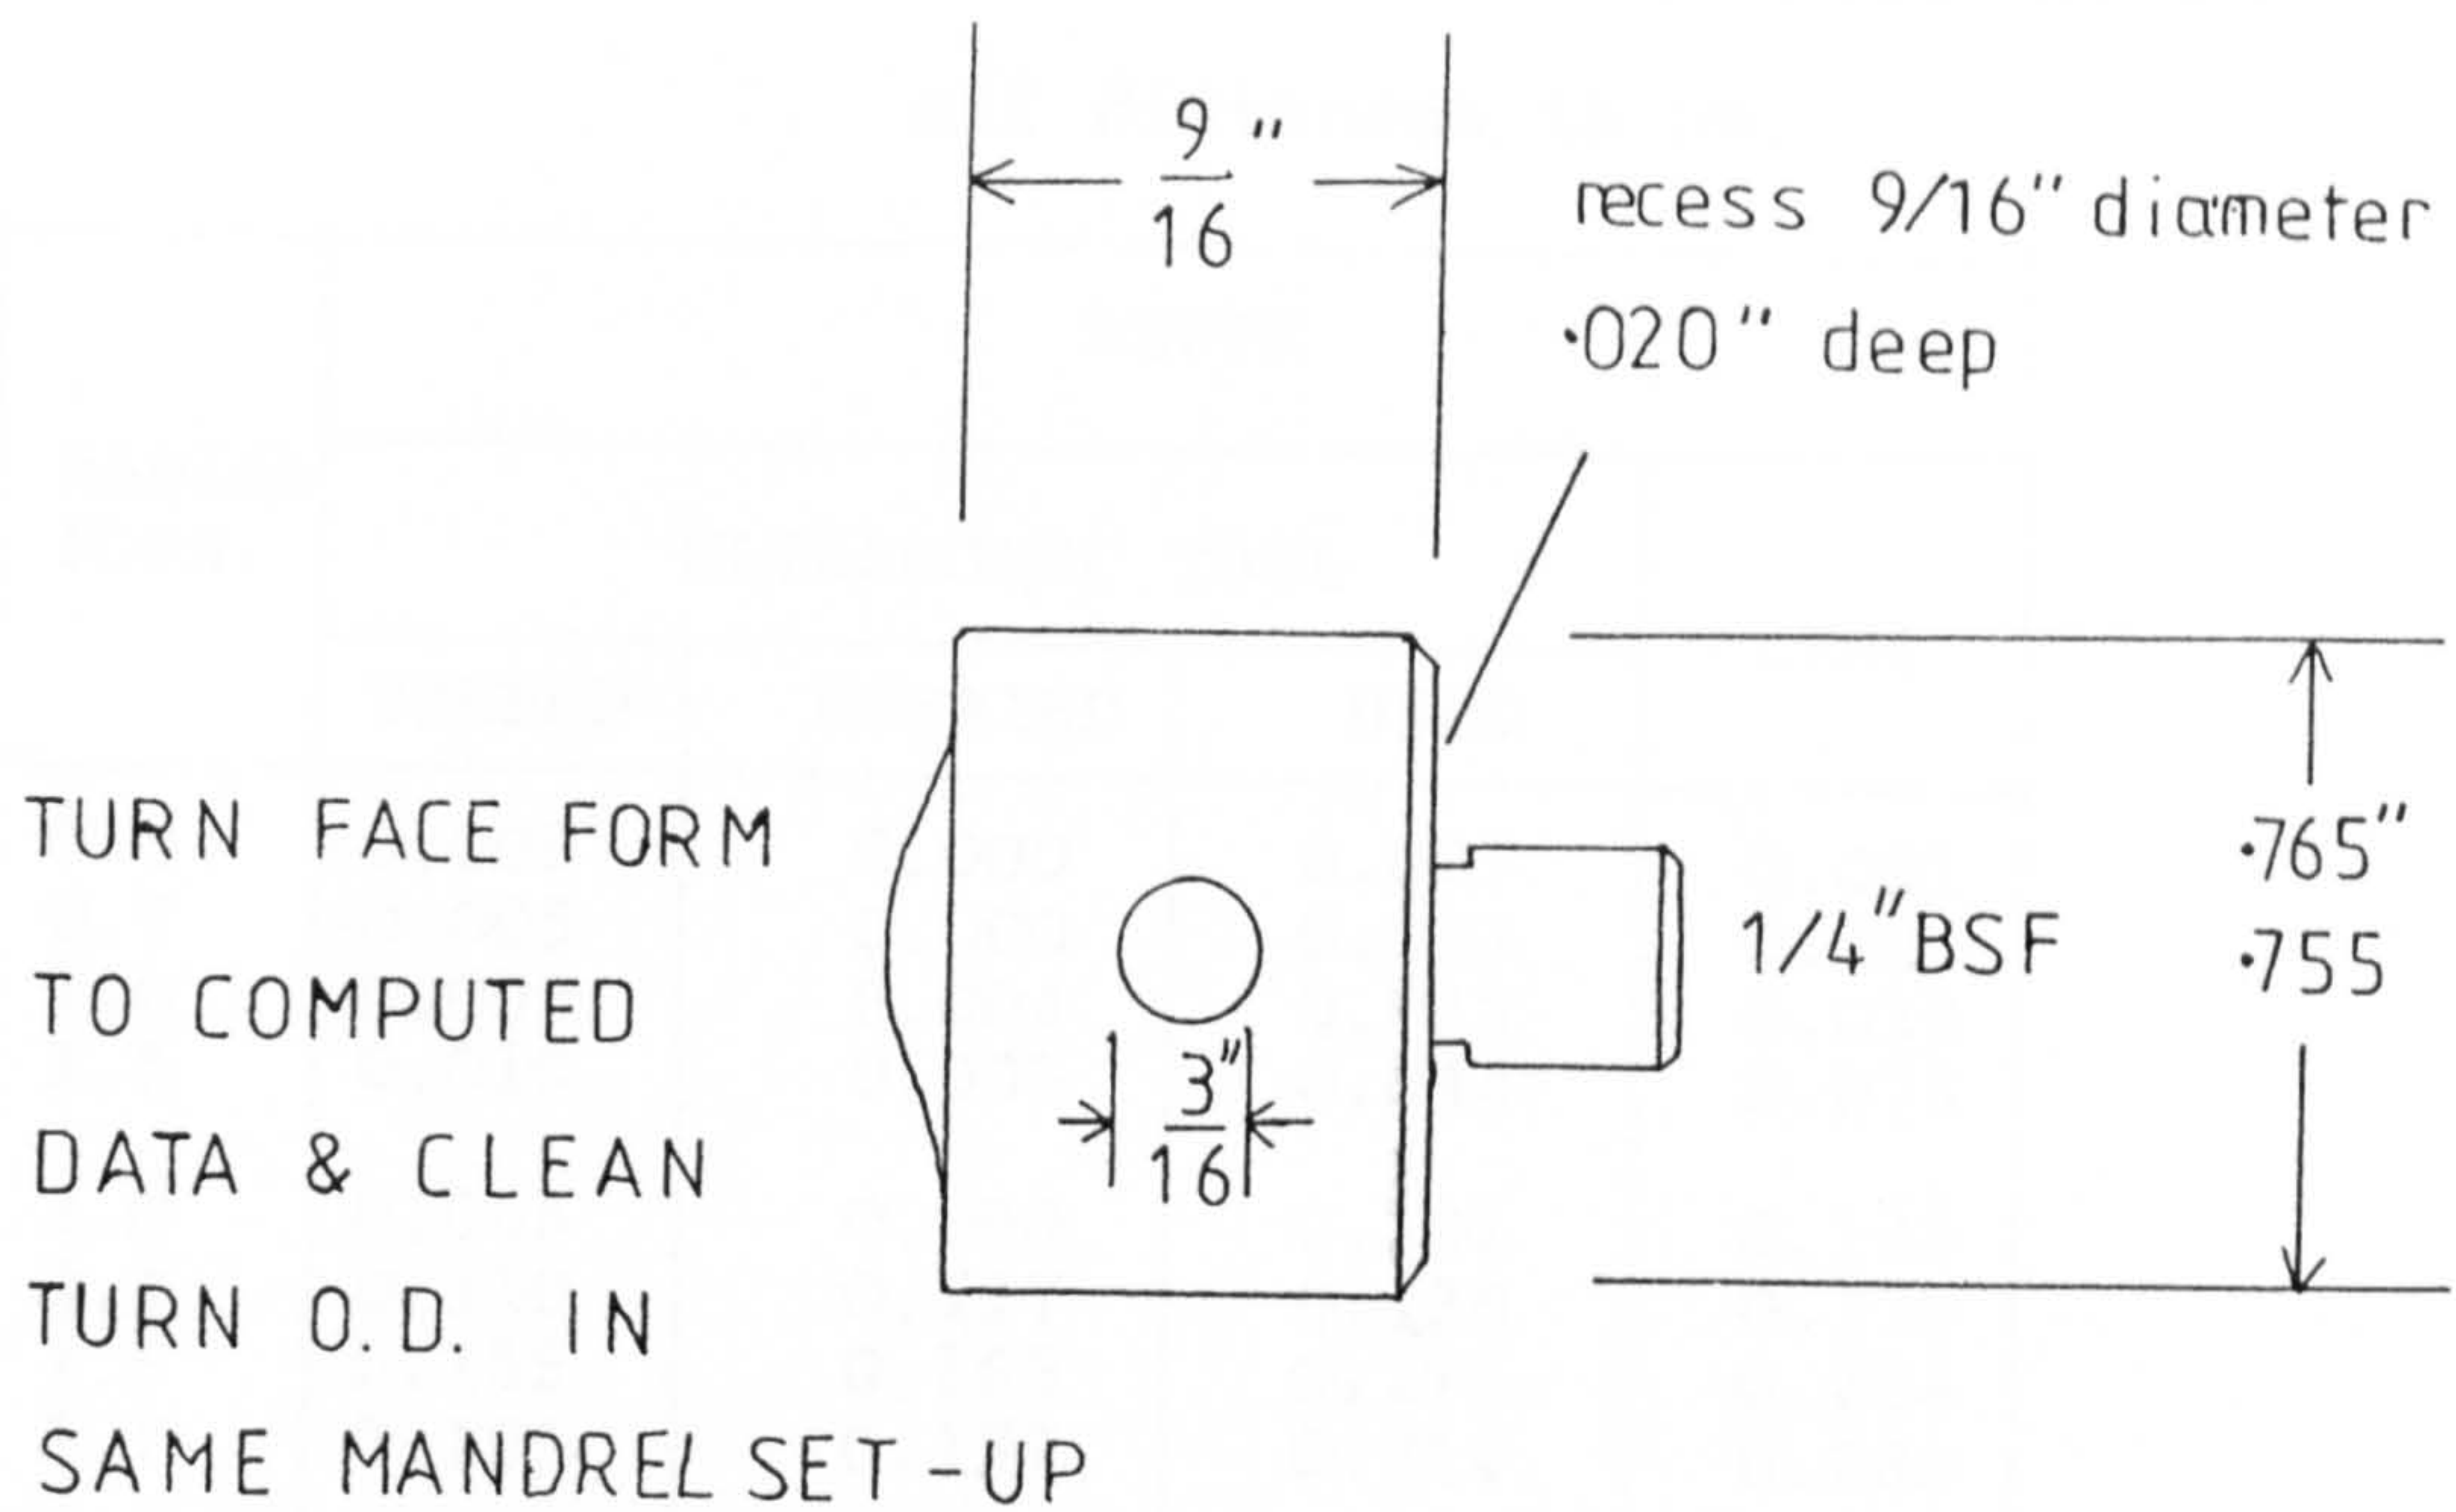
Drawing of tool for ultrasonically grinding lens depressions.
